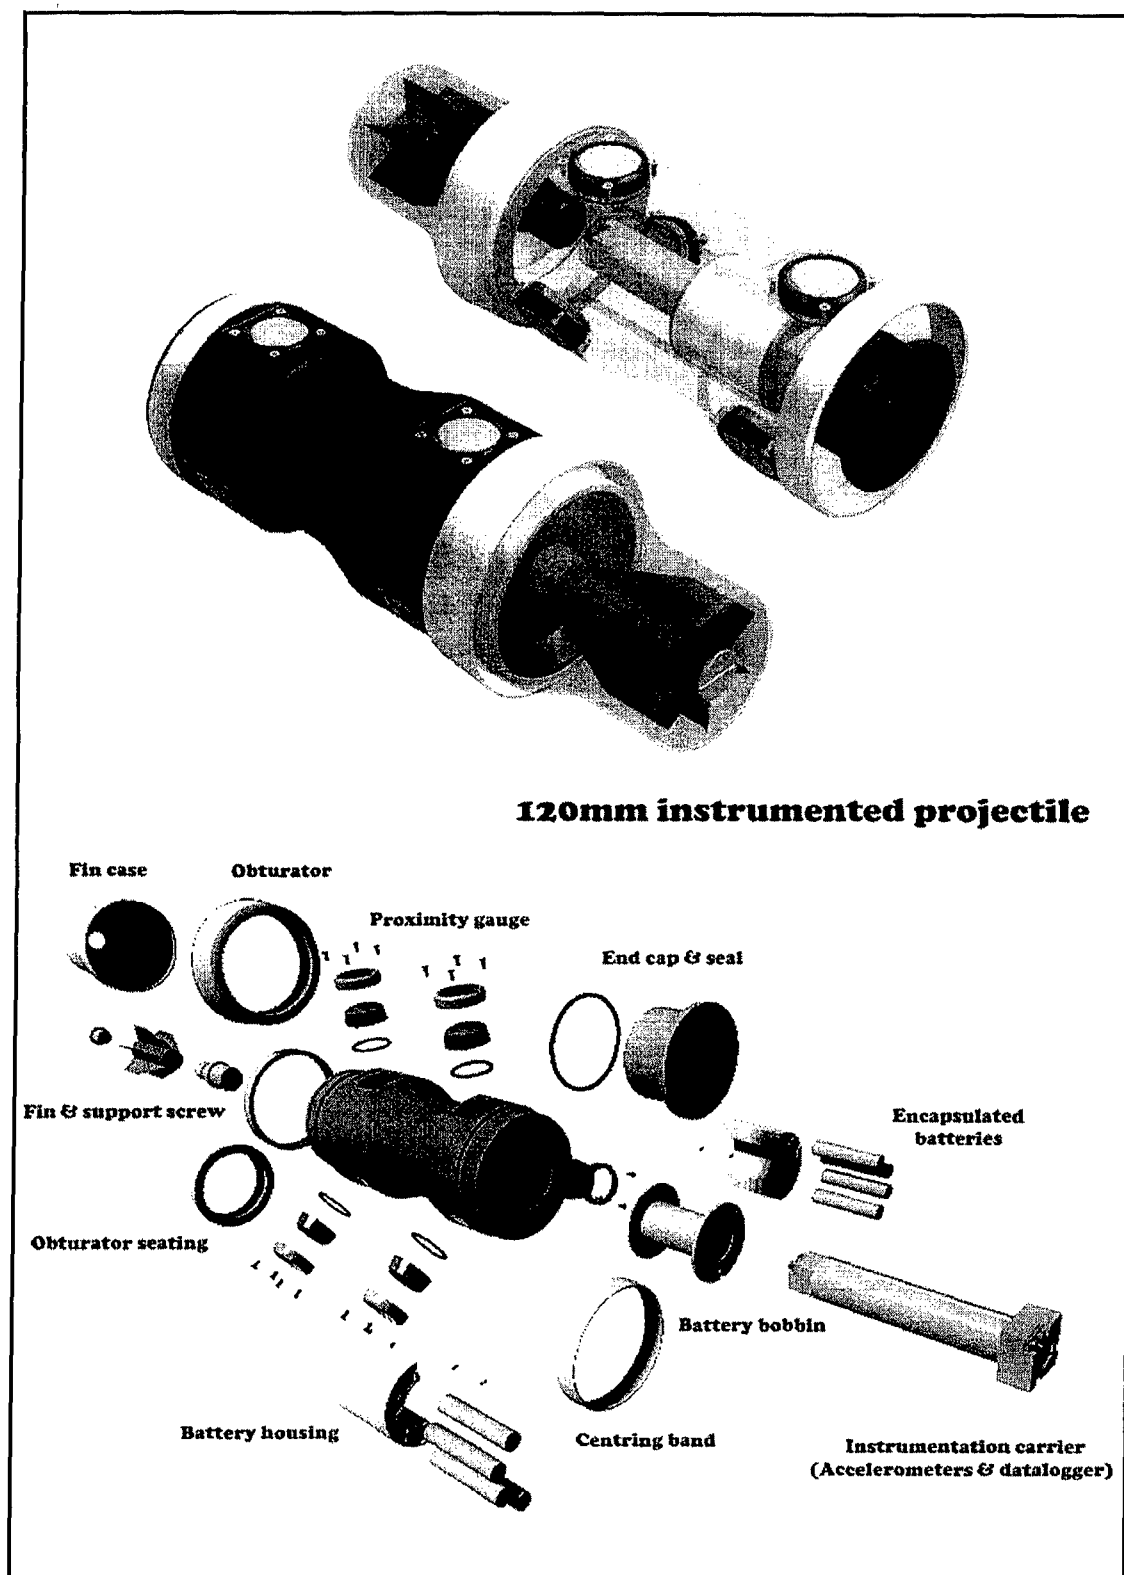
Exploded view of the 120mm instrumented projectile.
